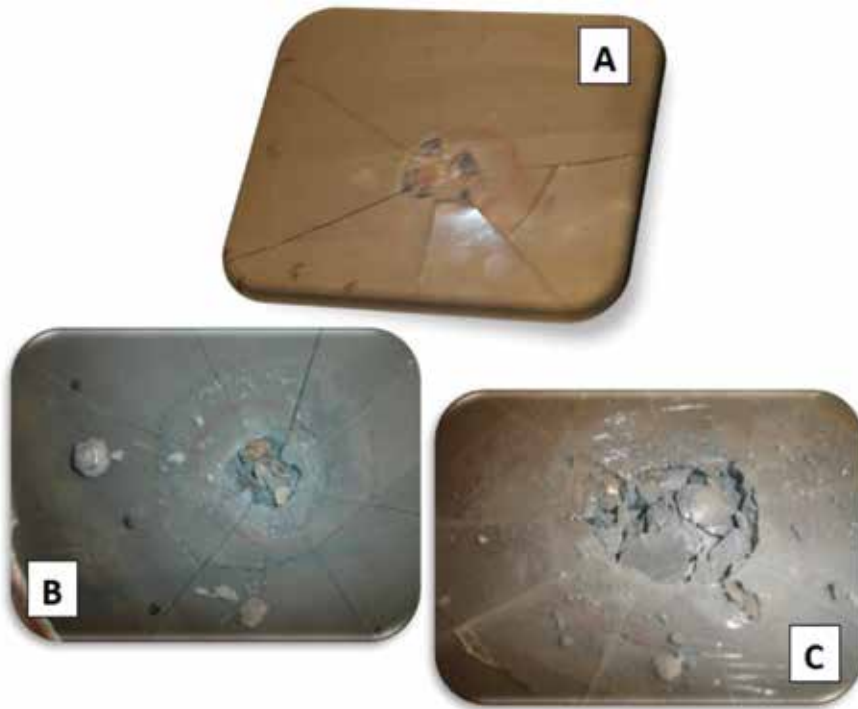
Fractography in the ceramic plate with reduced porosity.
